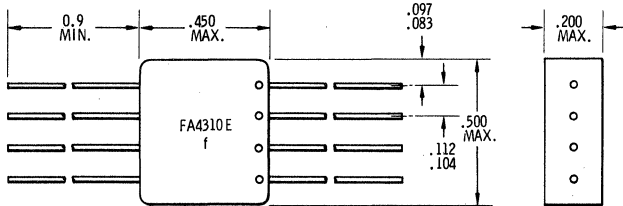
ENCAPSULATED MATCHED PAIR PACKAGE DIMENSIONS.
